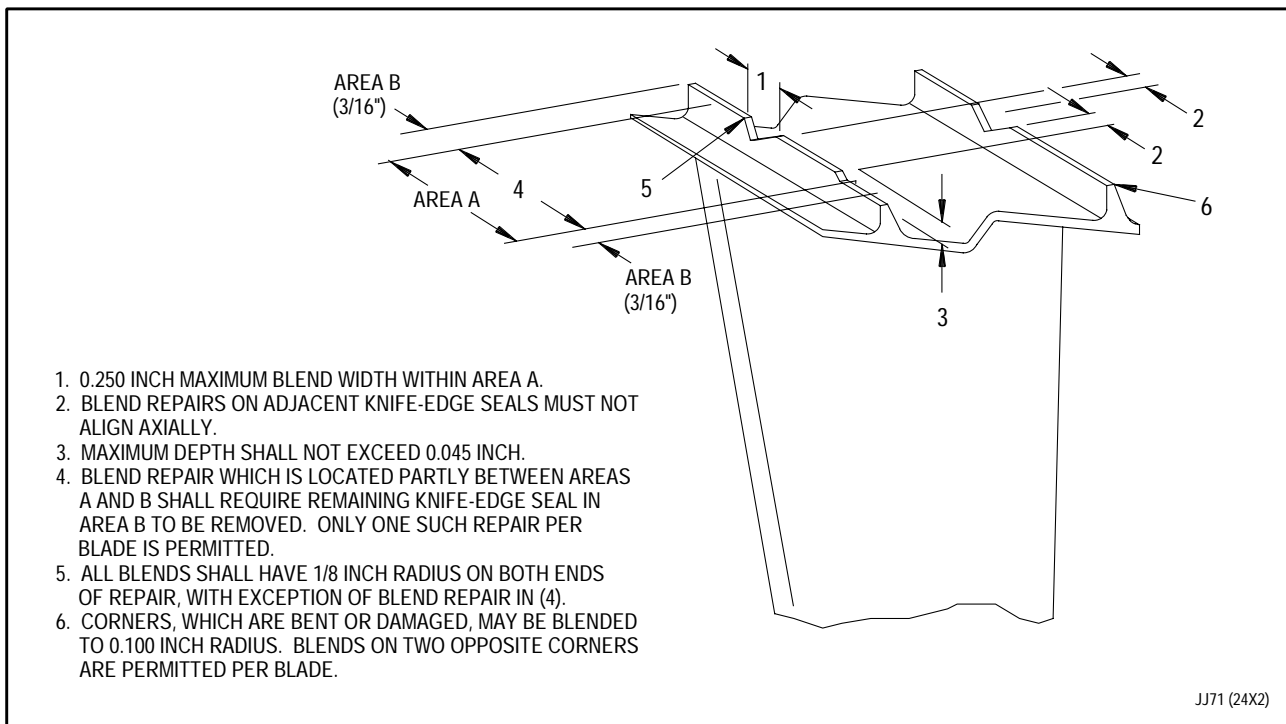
Fourth Stage Turbine Rotor Blades - Knife-Edge Seals Blend Repair
